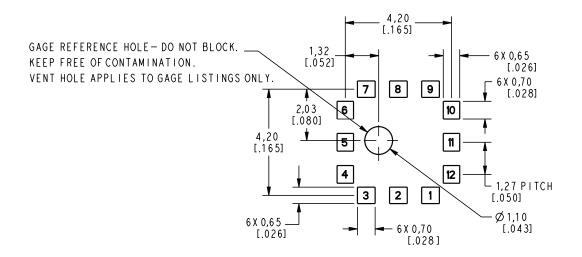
SHORT PORT AND RECOMMENDED PCB PAD LAYOUT DIMENSIONS (FOR REFERENCE ONLY: MM [IN].)
